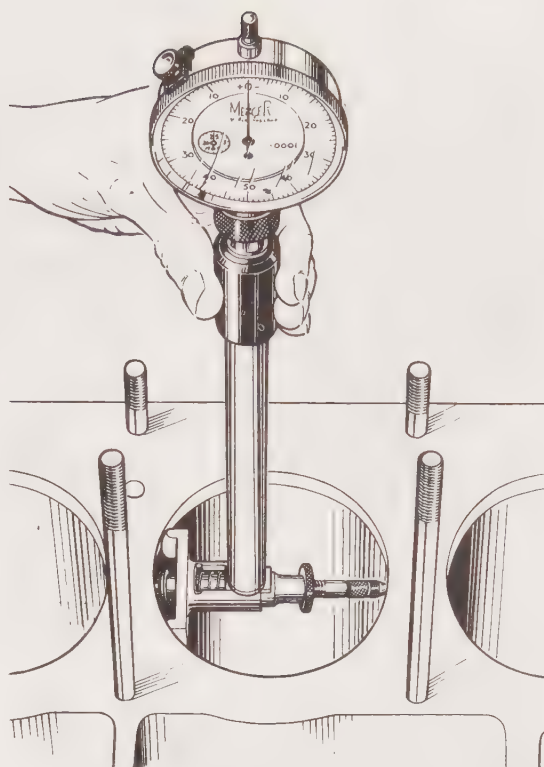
21 Measuring cylinder bore wear by means of a dial gauge.
